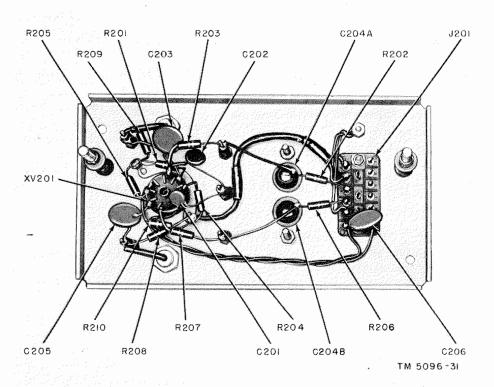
Preamplifier subchassis, location of parts, bottom view.
